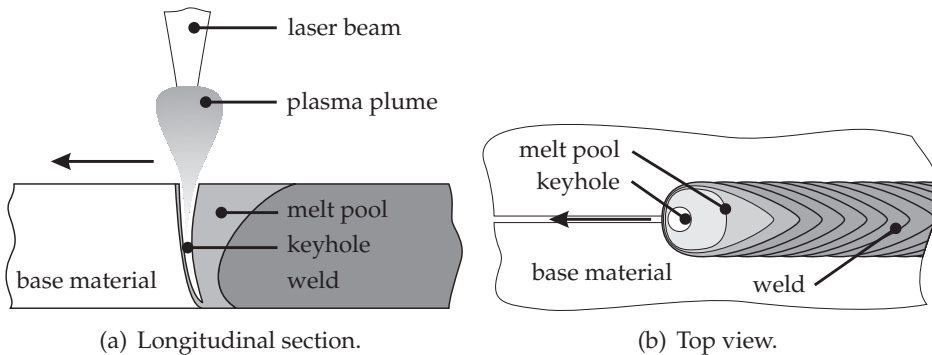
Illustration of the principle of keyhole laser welding.
